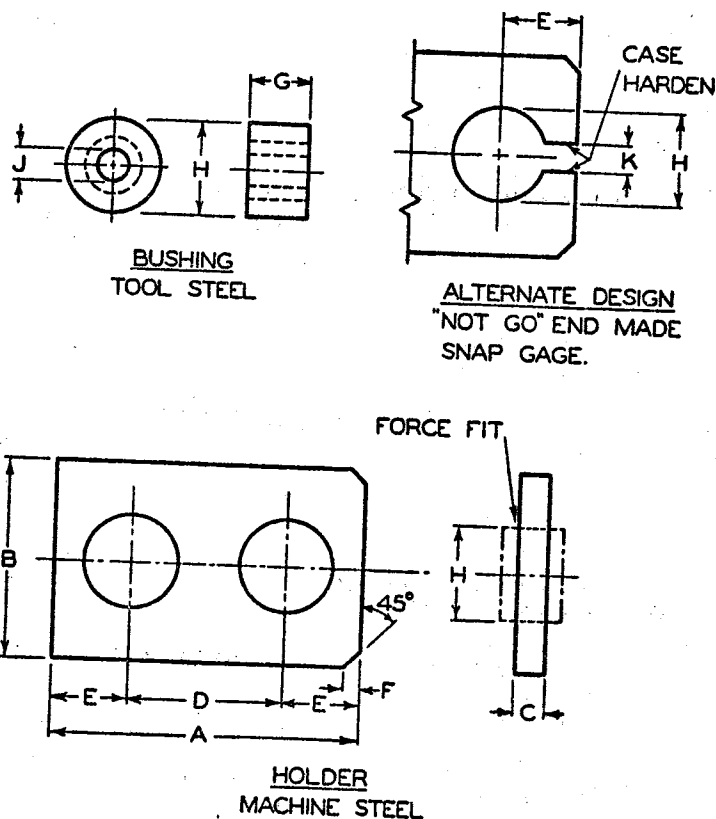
American Gage Design Standard twin ring gage, details of construction.
